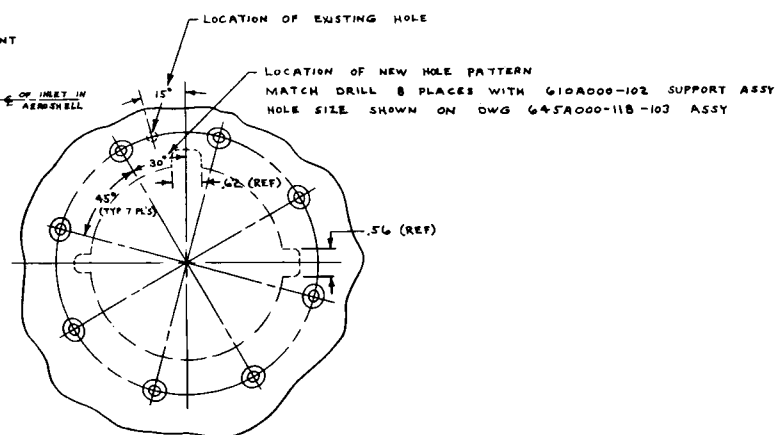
Model Assembly with 60-In. Dp (Sheet 3)
